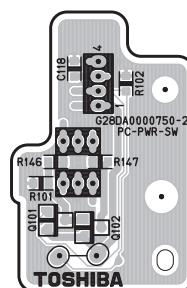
Power Switch PC Board (Bottom side)
